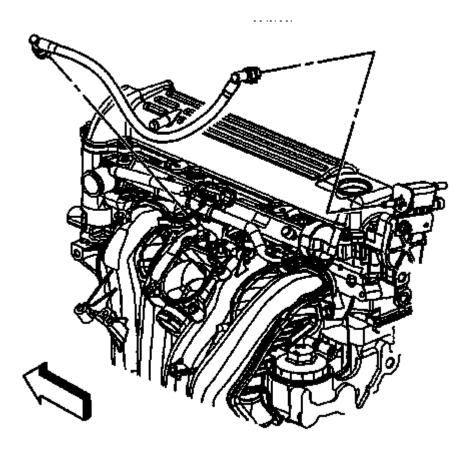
Intake Manifold Lower Bolts Courtesy of GENERAL MOTORS CORP.
